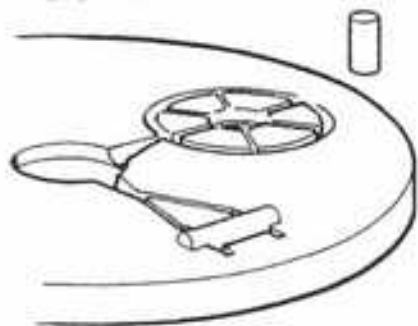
Showing core and mould. The core is simply inserted into its cavity before casting, and withdrawn when the metal has set.
